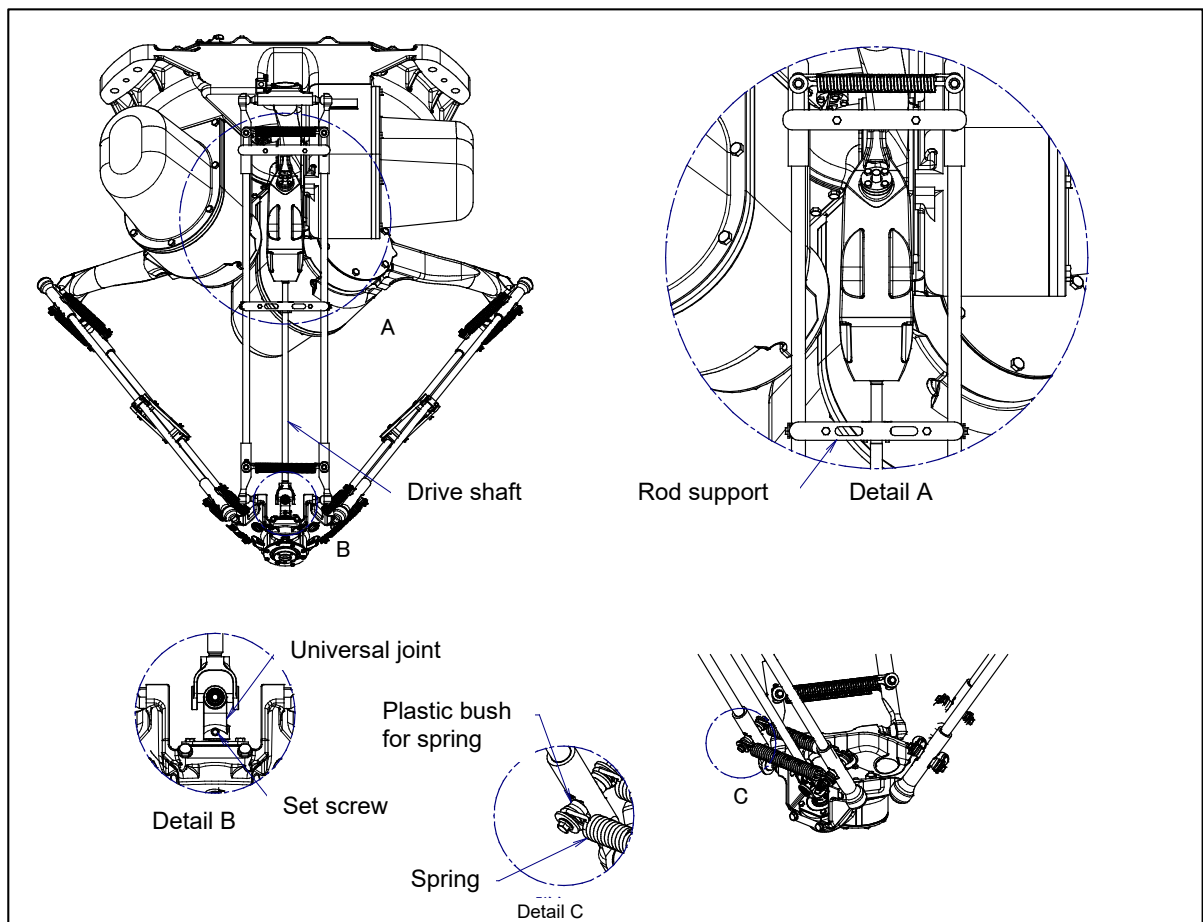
(b) Check the drive shaft, rod supports, universal joints, springs and plastic bush for spring
